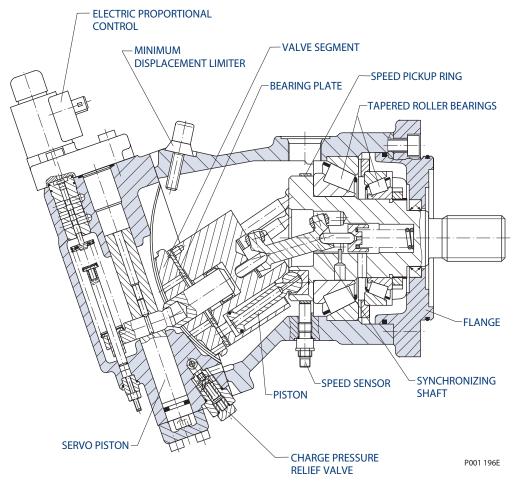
Sectional view of Series 51 variable displacement motor (SAE Flange Configuration) with Hydraulic Proportional Control
